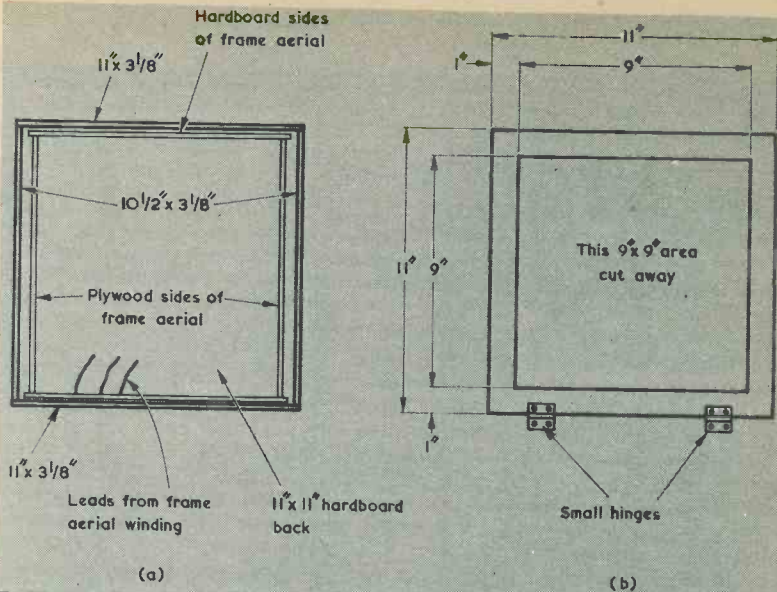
(a) The upper and lower sections of the frame aerial assembly
